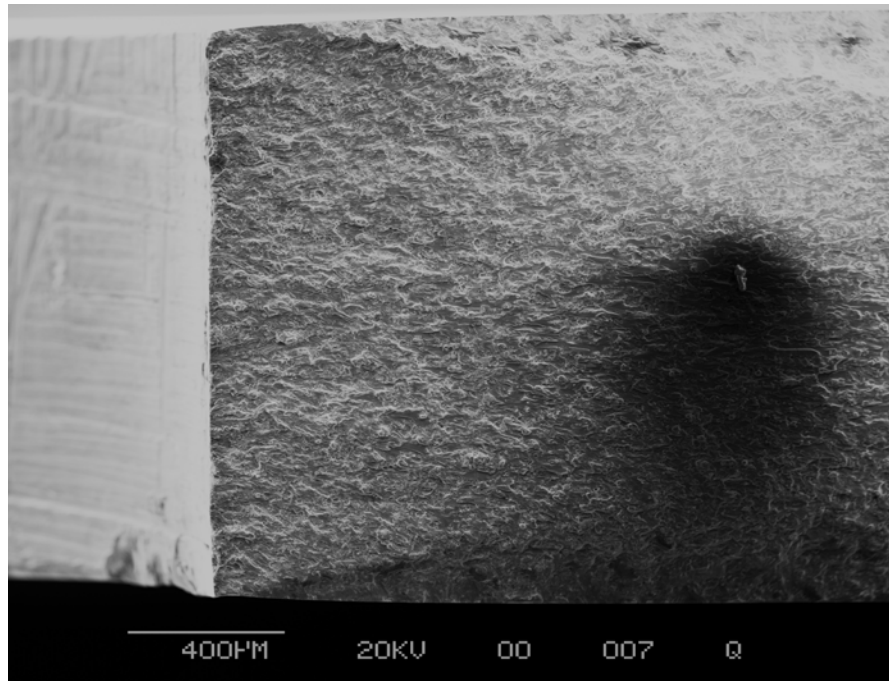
Fracture surface of specimen 12 showing crack initiation area
